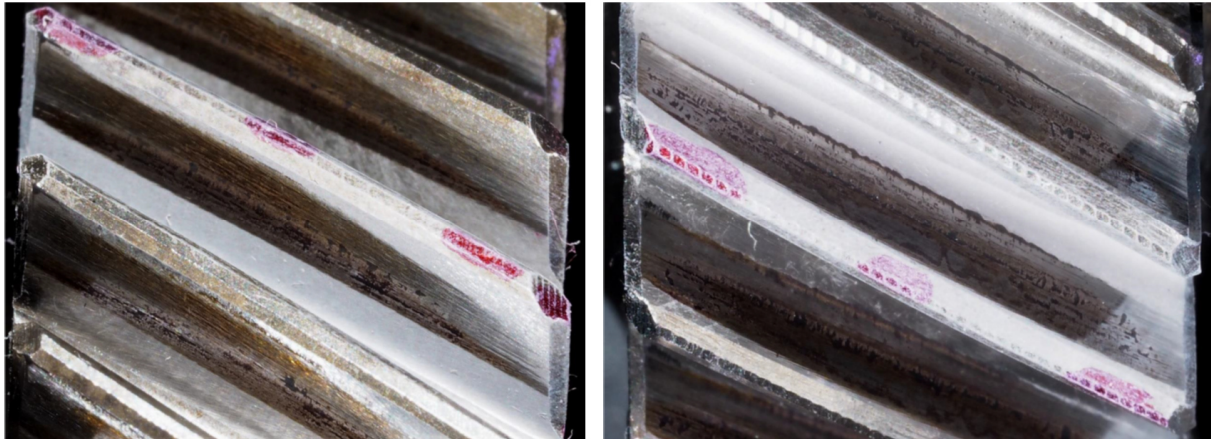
Result of the PM HIP:ed gears summative contact pattern test (6th speed) by nominal test load (torque), gearset 1, gear 1 ($z=48$, left), gear 2 ($z=31$, right)
